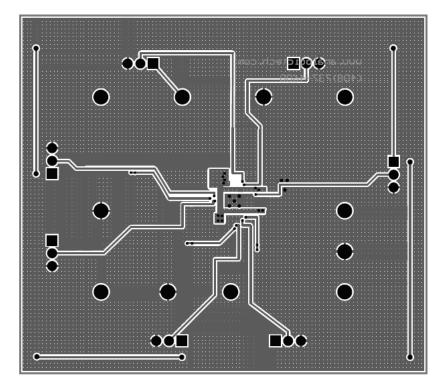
AAT2603 Evaluation Board Bottom Side PCB Layout.
